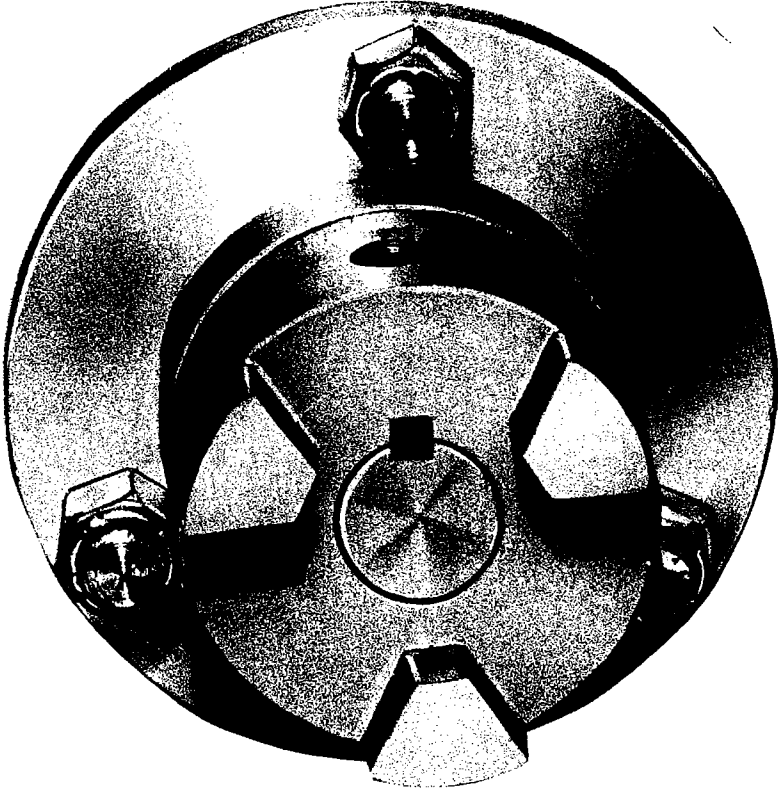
LOWER BEARING ASSEMBLY WITH ONE HALF OF LOVE-JOY COUPLING.
